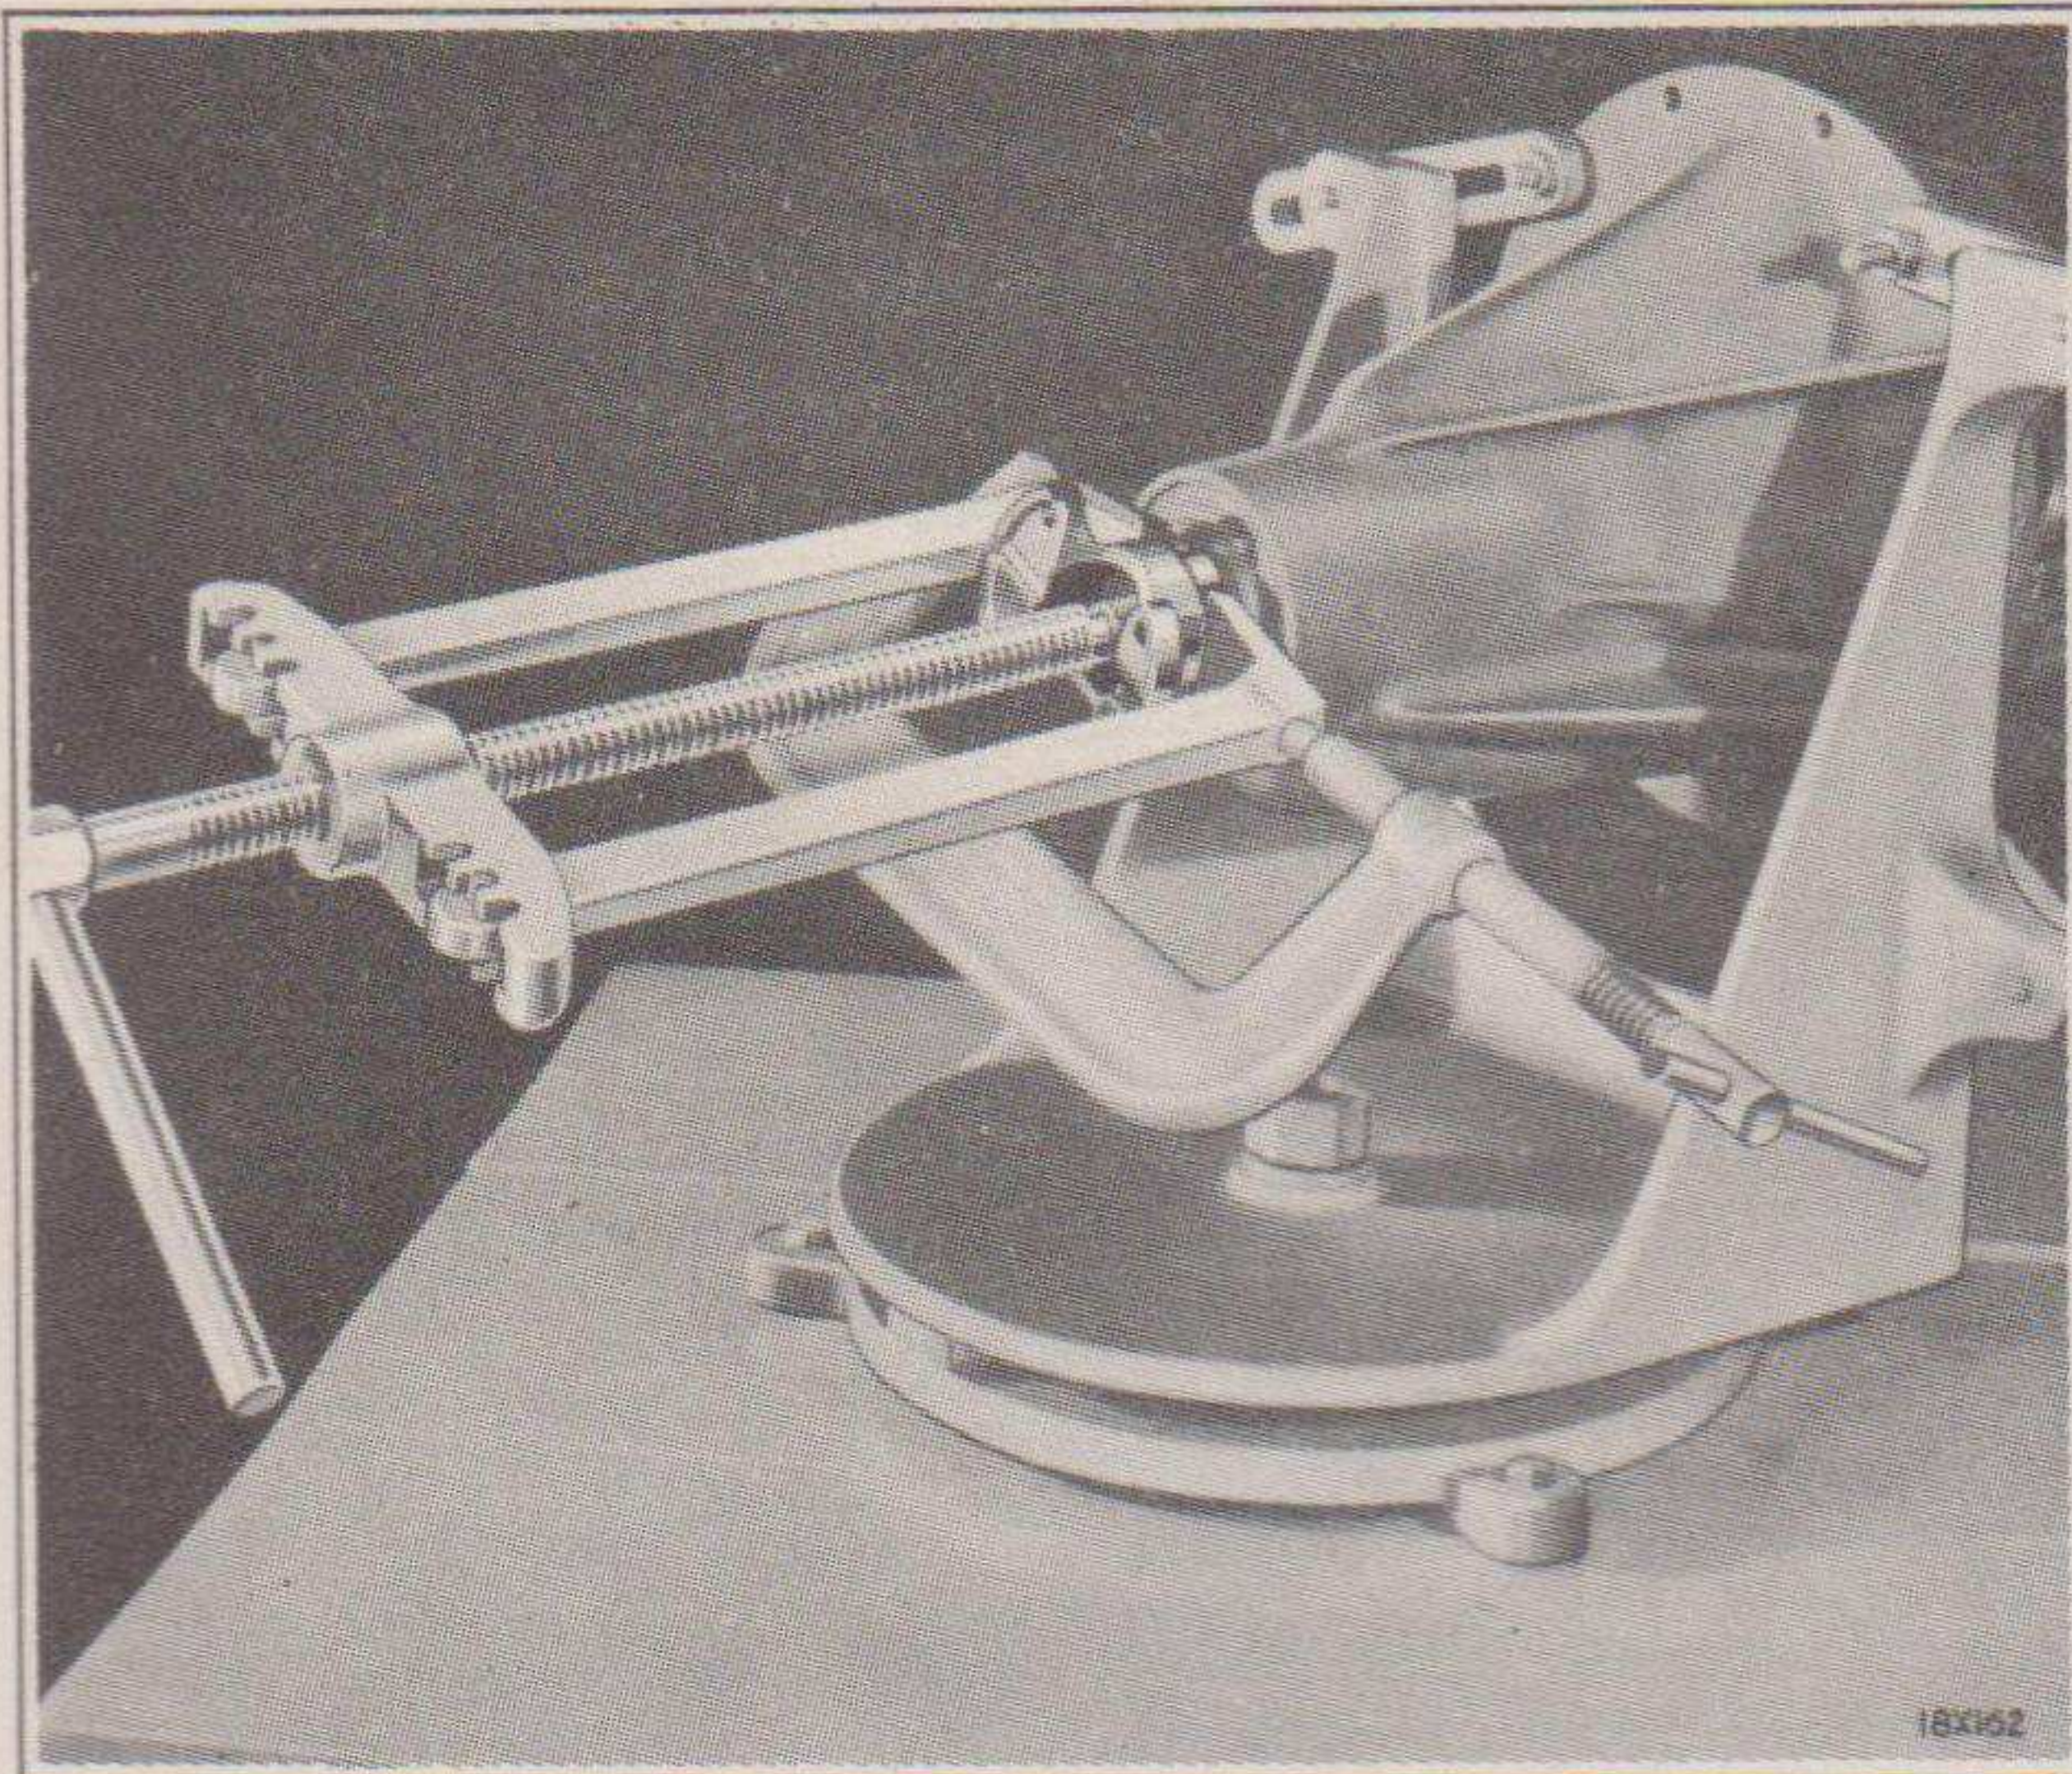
Removing Propeller Shaft Companion Flange or Yoke (Tool CM-549)
